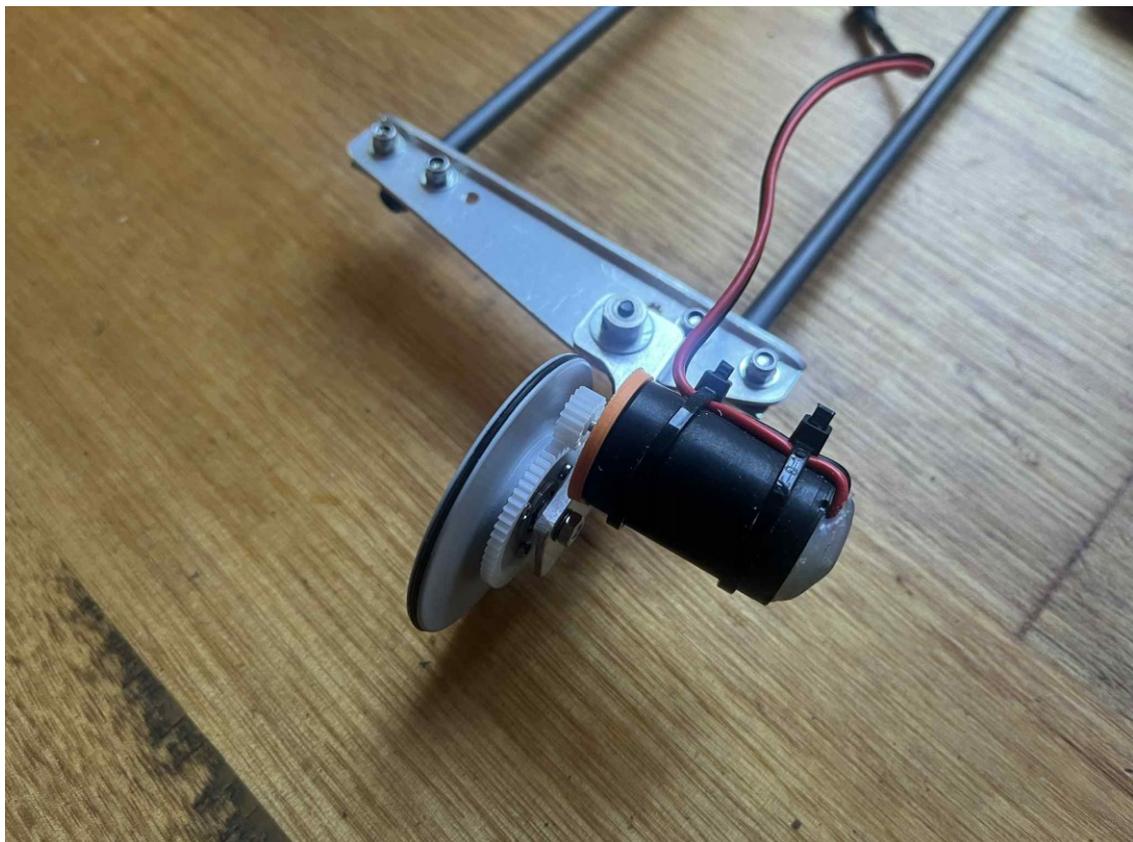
wheel rear assembly with motor and wheel attached (top view)
